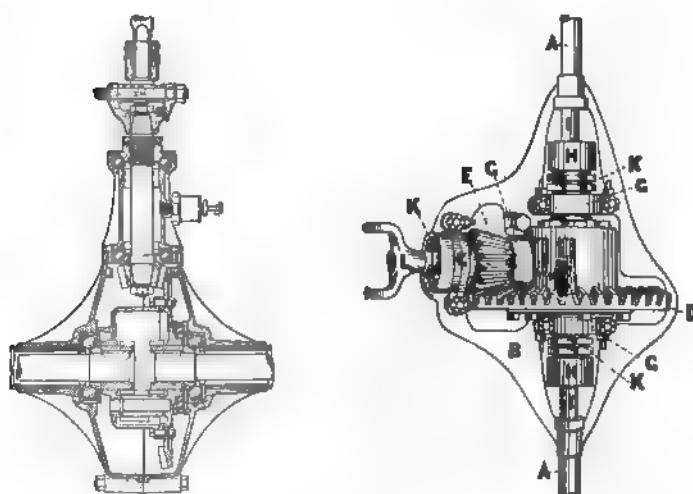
Sectional diagram of the bevel-drive of the Pierce Car, showing arrangement of the propeller shaft and location of the thrust bearings.
